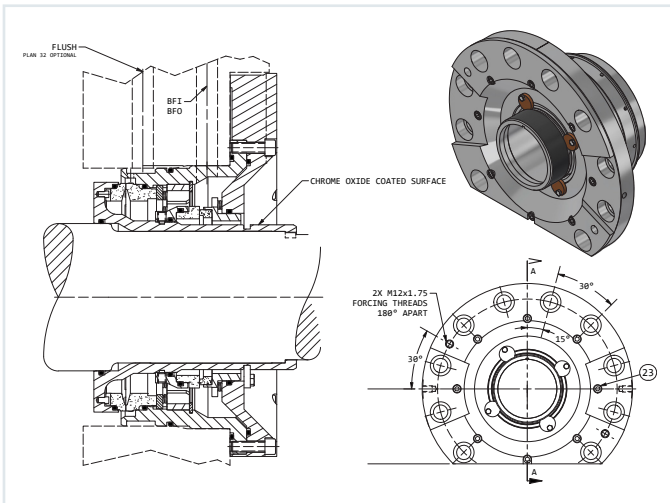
Drawing of Newly Installed Style RKCMD Mechanical Seal
